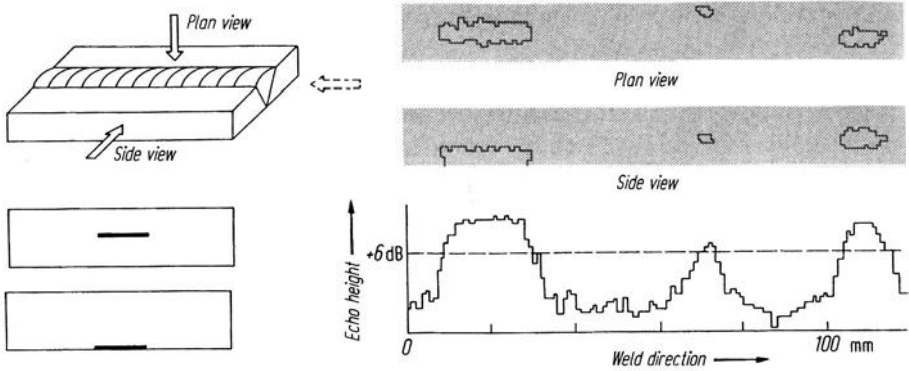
Principle of the P-scan method on a weld
